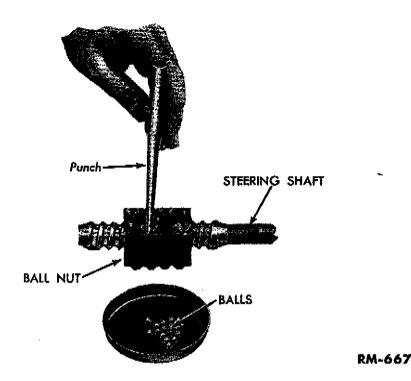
Aligning Ball Nut on Steering Tube Shaft
